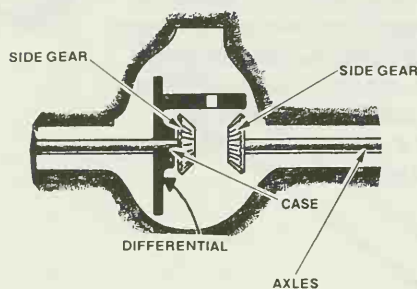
Each axle has a side or differential gear attached to it. (GMC Truck and Coach Division of General Motors Corporation)
